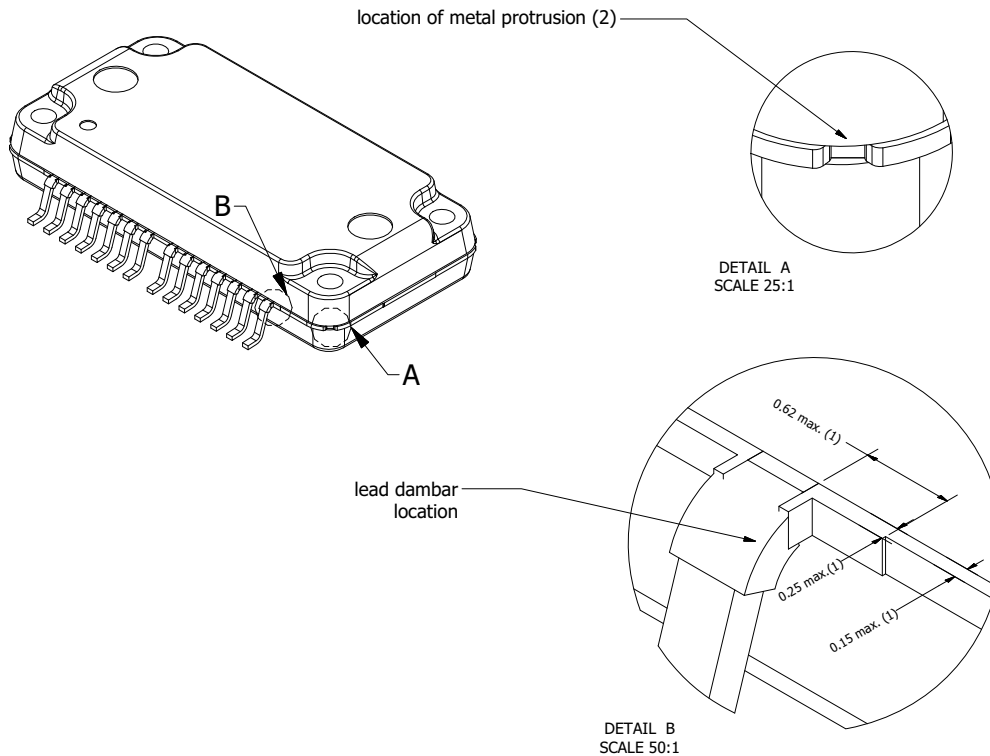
Package outline OMP-780-16G-1 (sheet 1 of 2)
